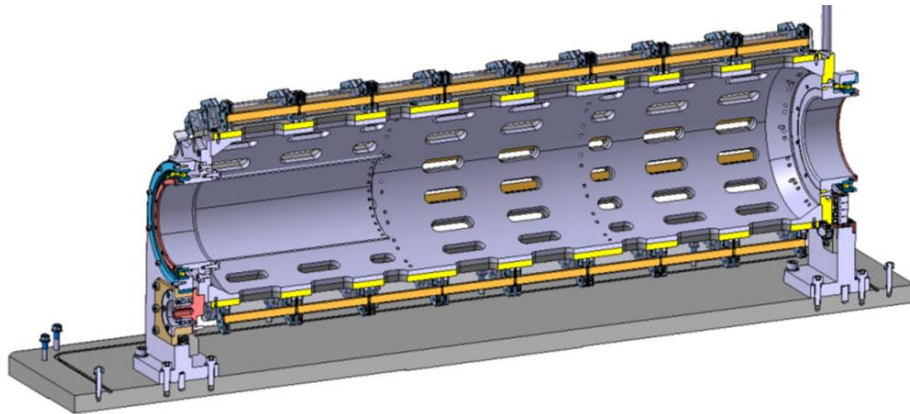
Section view of sample holder showing material specimens equipped in series.
